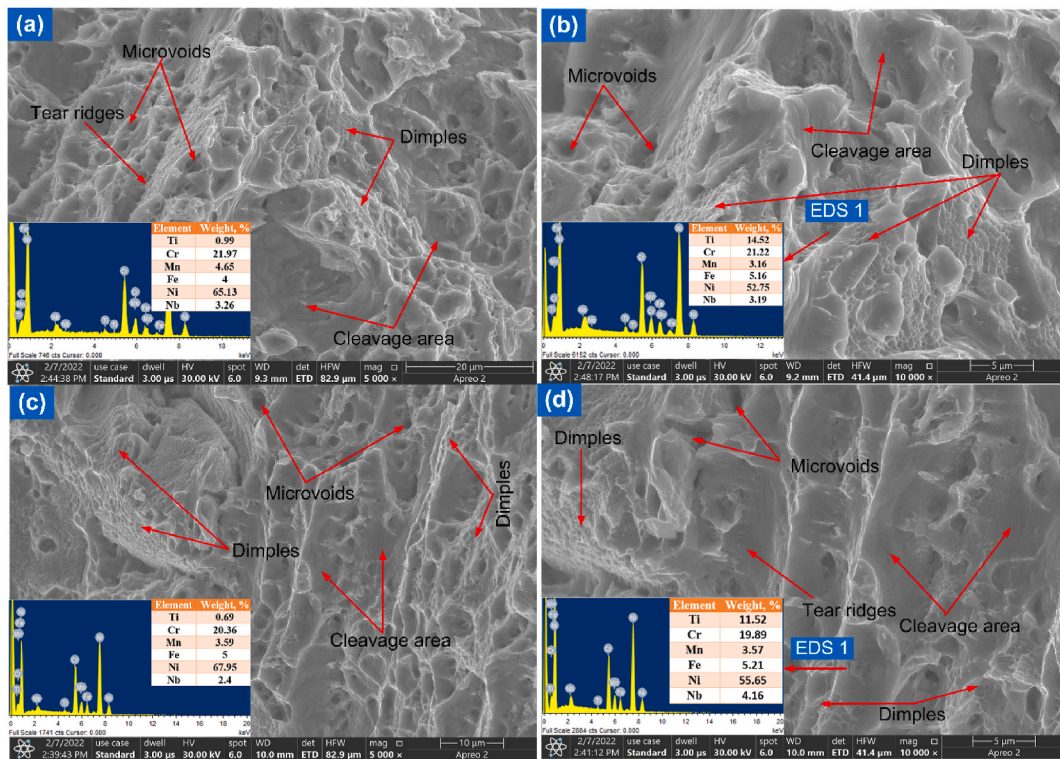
Fractured surface of tensile tested specimen for VG weld joint in (a, b) AW state, (c, d) PWHT state.
